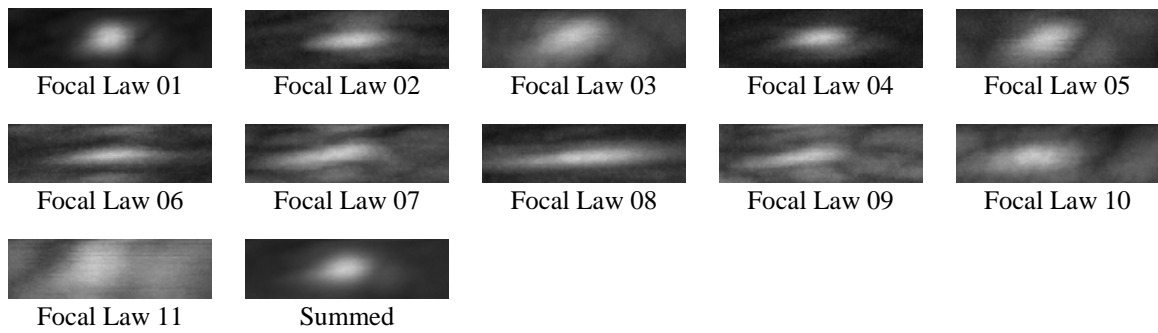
3D method inspection C-scans of curved interface forging coupon #11.
